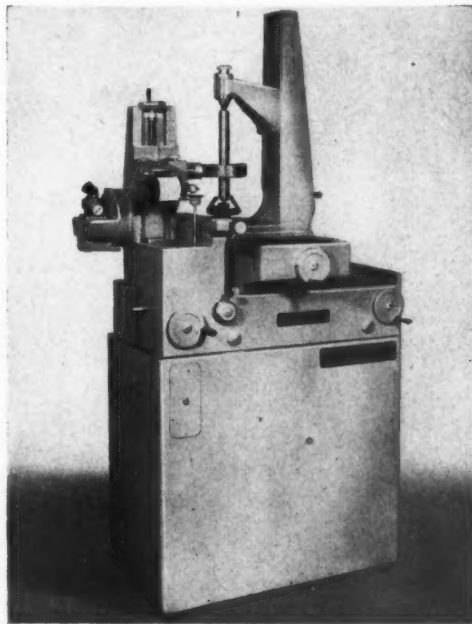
The new David Brown No. 18 combined involute and helix angle testing machine, fitted with a mechanical-type recorder
